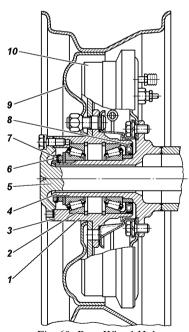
Rear Wheel Hub: 1-hub; 2-bearing; 3-gasket; 4-journal; 5-axle shaft; 6-lock nut; 7-lock washer; 8-collar; 9-wheel disk; 10brake drum
